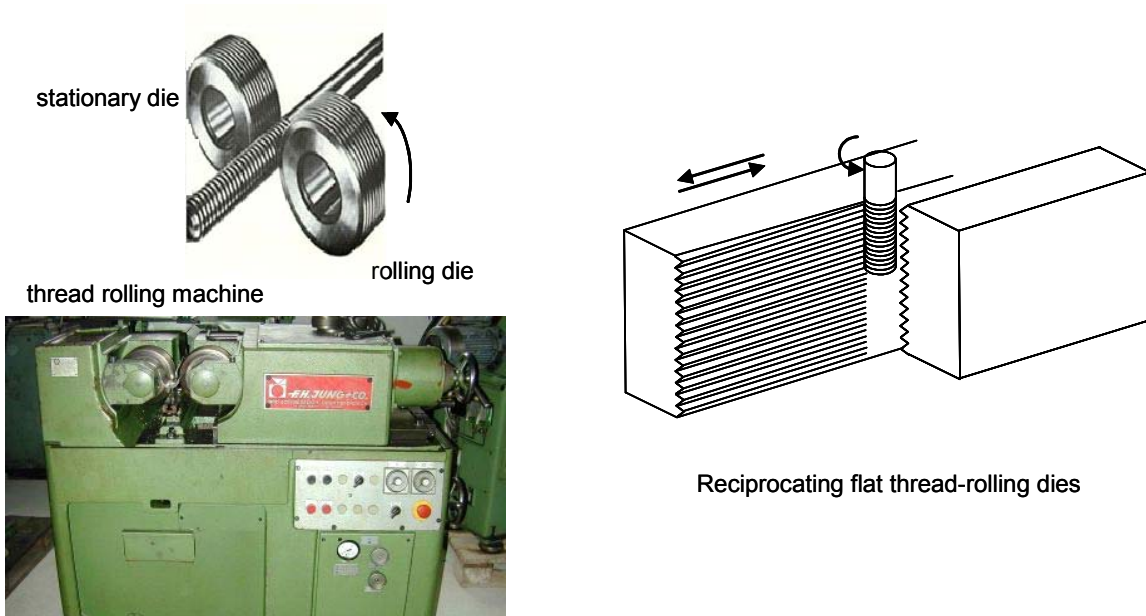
Two types of thread rolling processes (a) dual-roller dies (b) reciprocating flat dies
